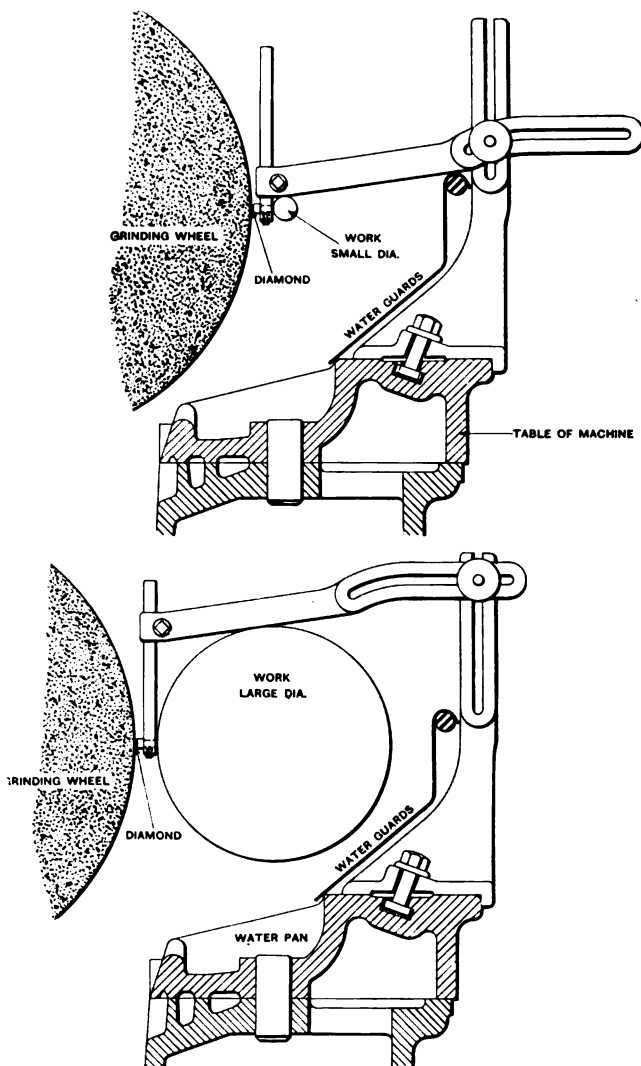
Grinding Wheel Truing Fixture, showing method of using and extreme setting positions for work of large and small diameters
